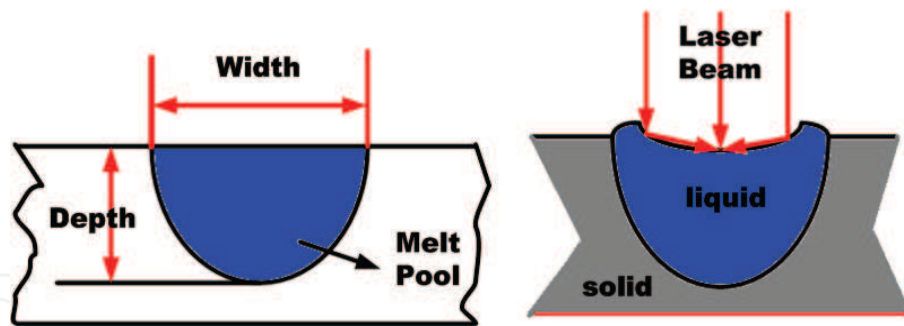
Weld pool (1a) Laser Welding (1b)
